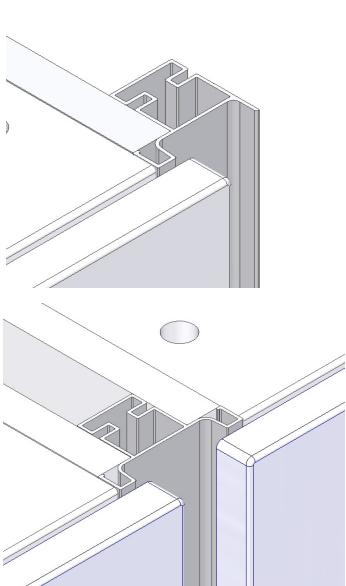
& 5: Position blender panel 2mm up from the bottom edge of the base unit. Screw fit through base unit side panel using 40mm pozi wood screws - Pilot drill first. Fig 6 (see page 11): If the end unit incorporates a middle handle profile for drawer unit this should be capped with: LNMIDCAP before fitting the blender panel.
